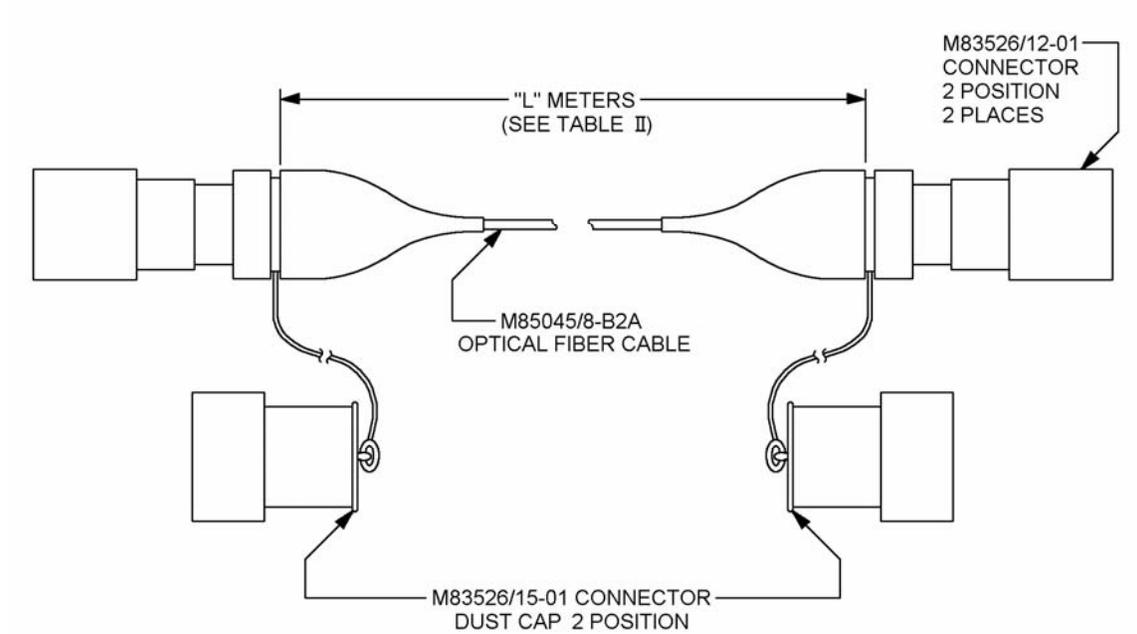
Outline drawing, cable assembly (hermaproditic) fiber optic.
